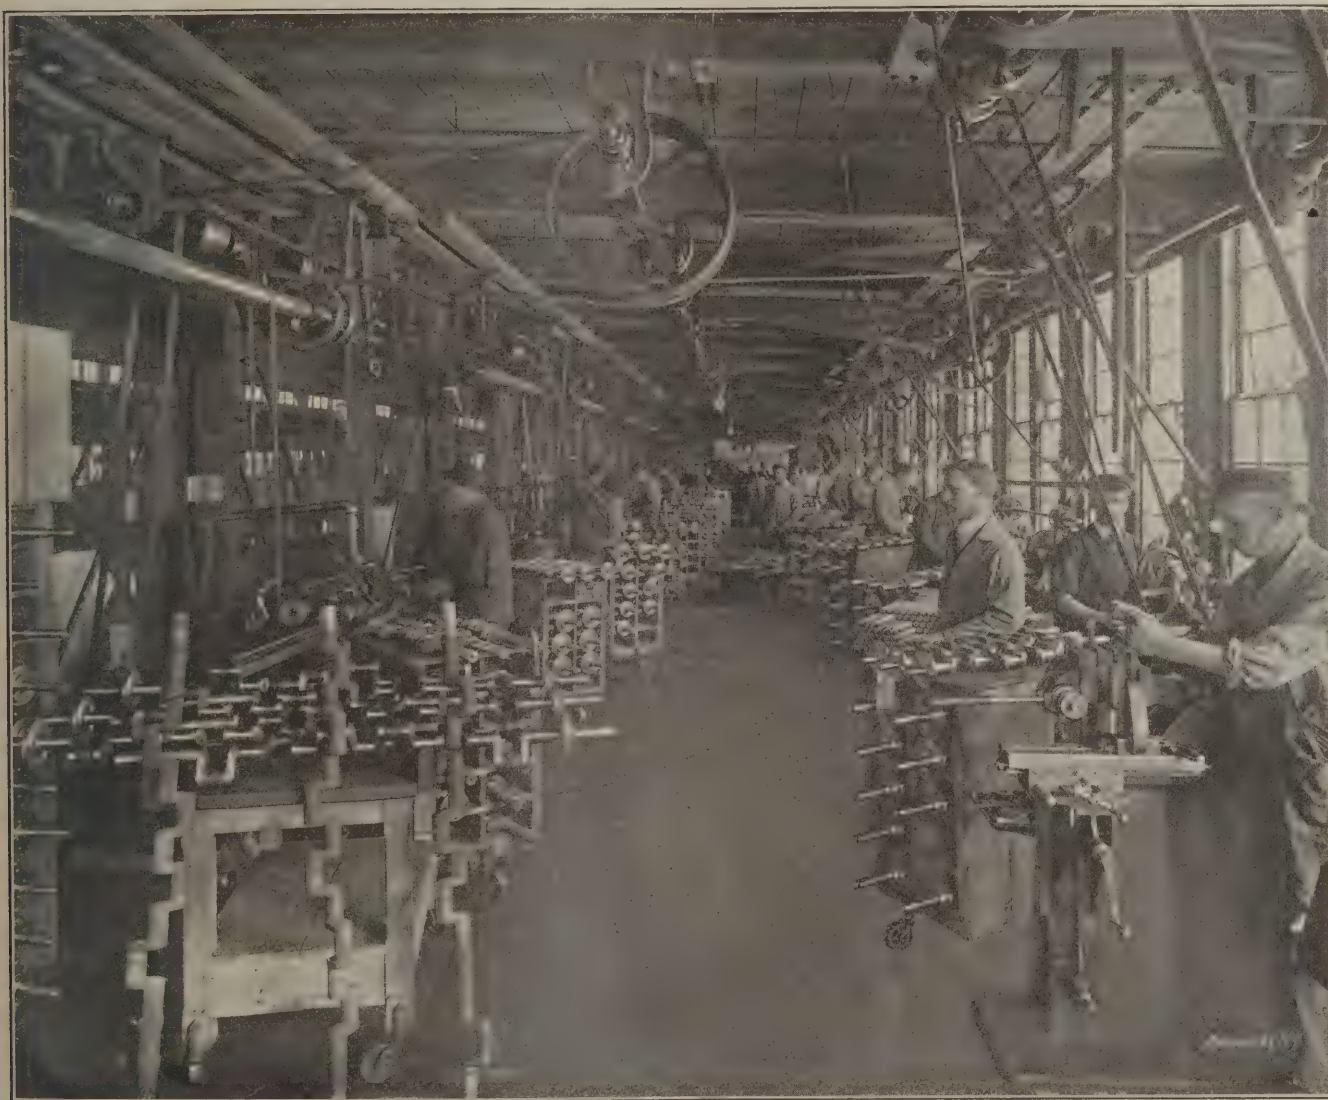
Automobile Crankshaft Grinding Department, Norton Grinding Co.
